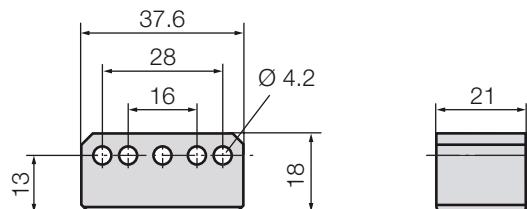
Installation dimensions for BTL6-A-3801-2
